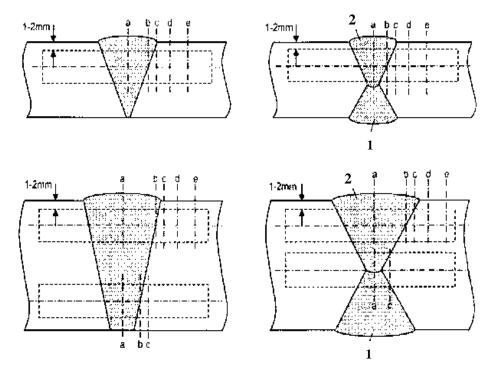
The diagram of cut-out and location of the cut in the impact test assembly with the approval of welding procedures with the heat input of more than 50 kJ/cm:
